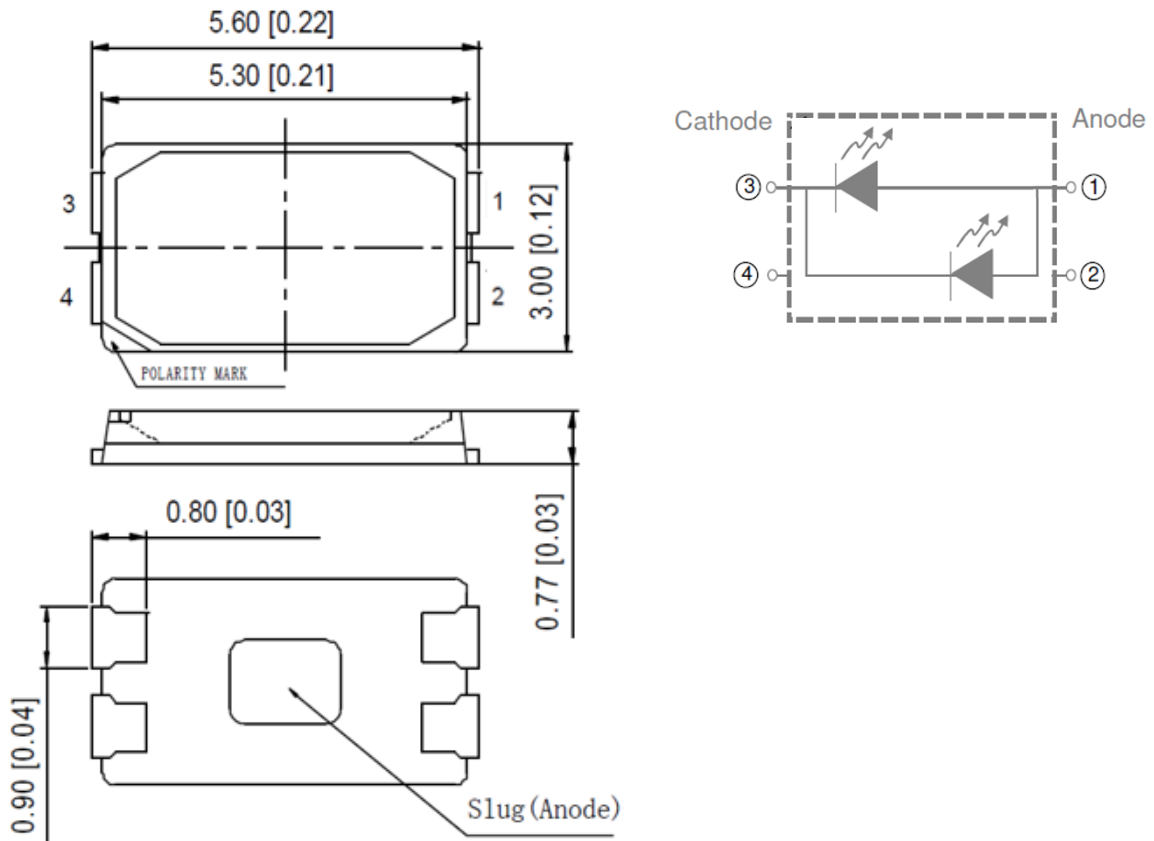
Mechanical drawings of the 5630 package, with unit in millimeter [in inches]
